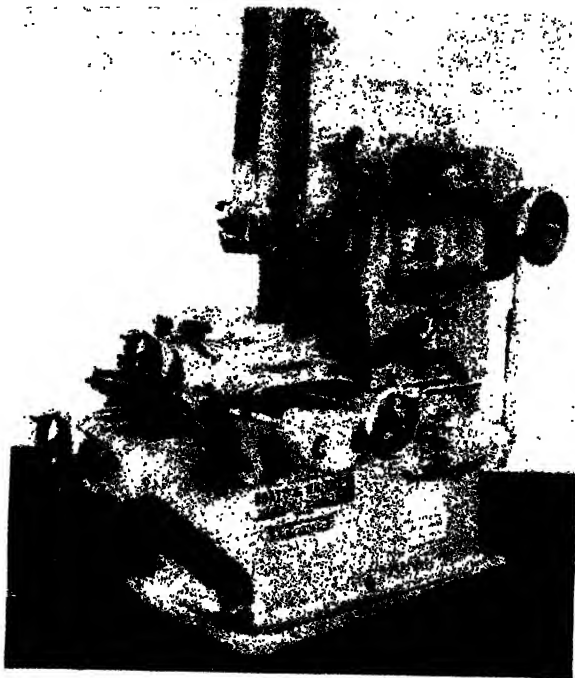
The vertical shaper, or slotting machine. (*Pratt & Whitney Company*)
